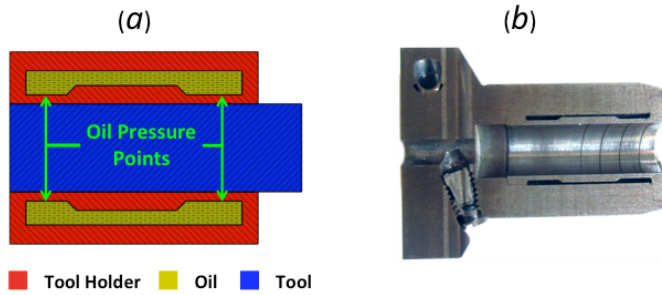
Hydraulic chuck holder scheme (a), real cross-section (b).
